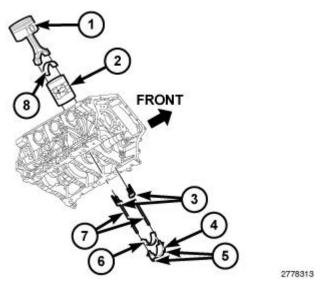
Piston, Connecting Rod Cap, Bolts, Plastic Guide Plates & Guide Pins Courtesy of CHRYSLER GROUP, LLC
